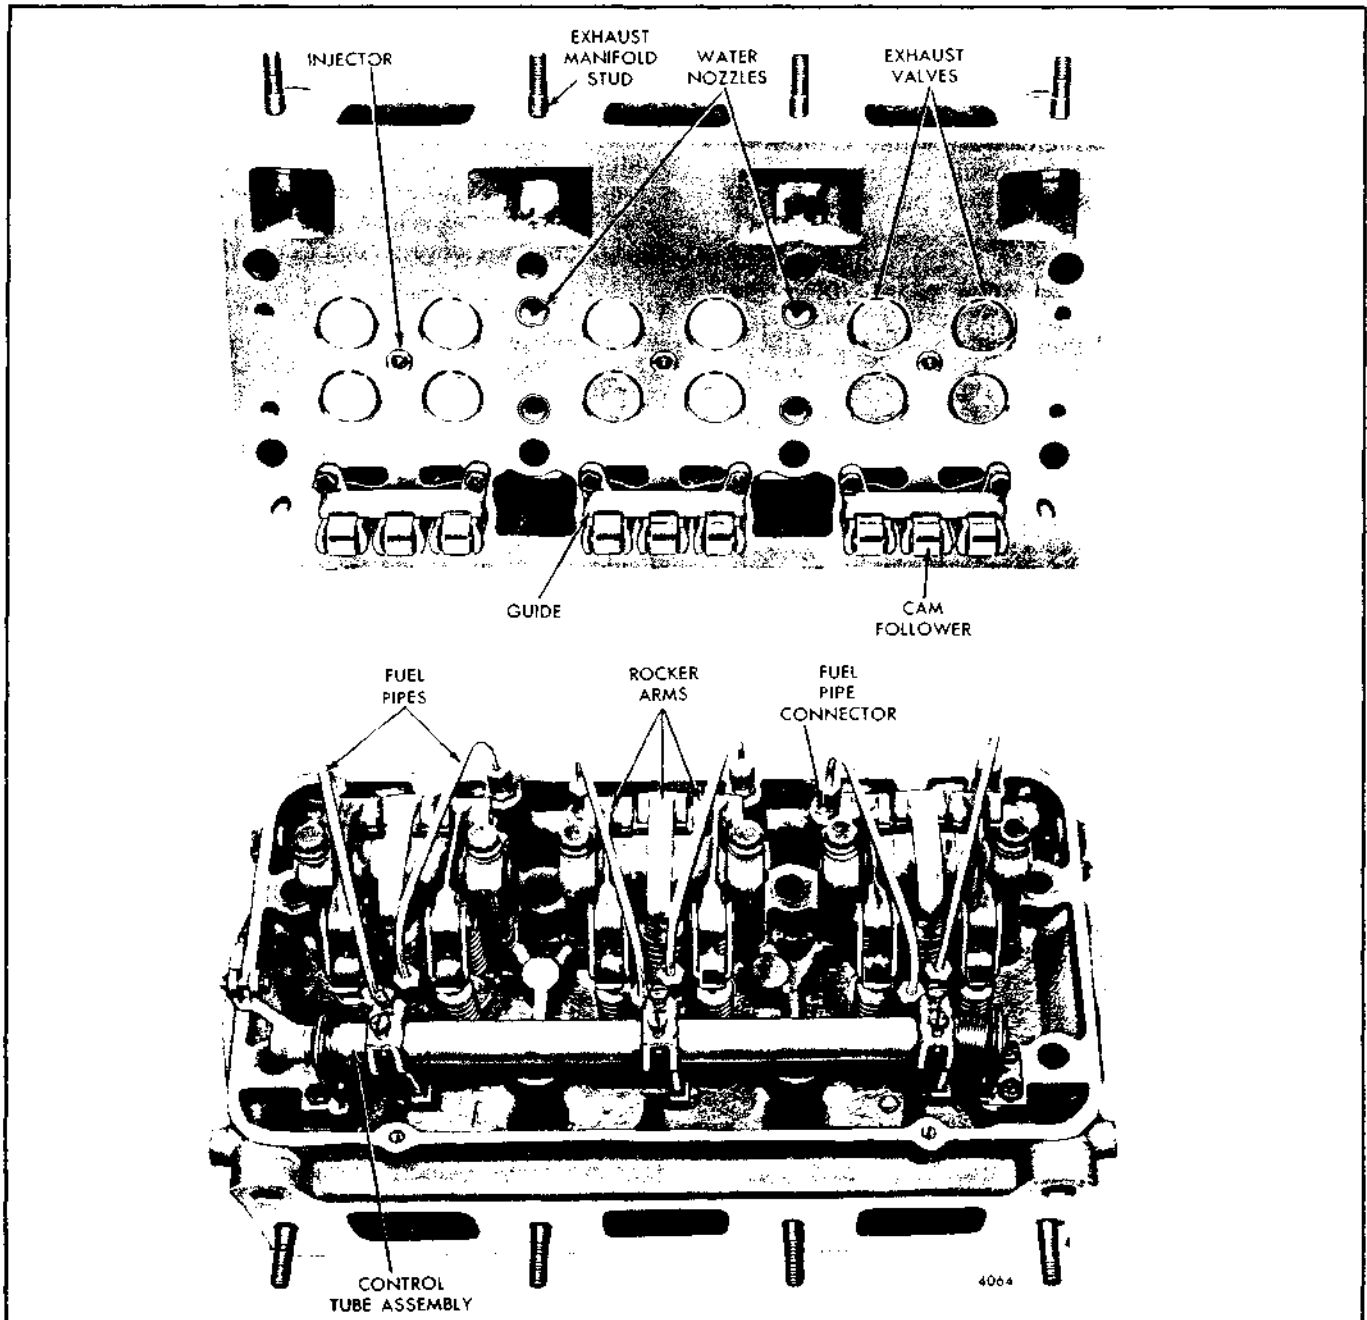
Typical Four-Valve Cylinder Head Assembly
